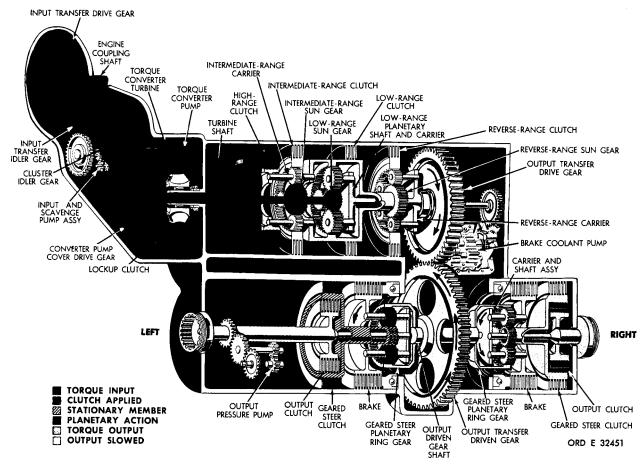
Fourth-gear, full-left-steer torque path, lockup operation
